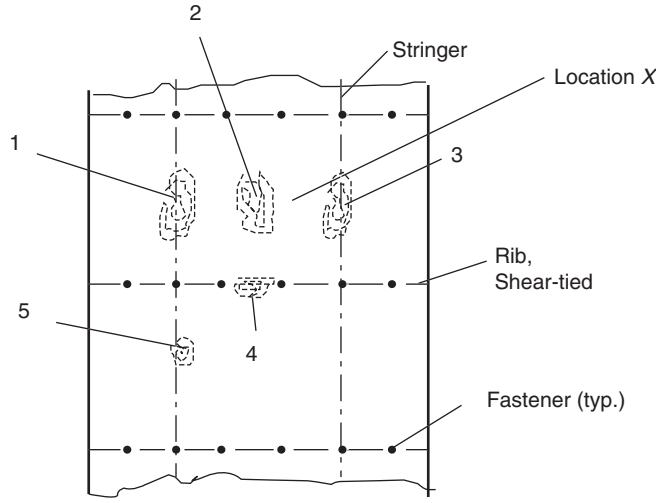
Design model for location X, with fasteners and damage.
